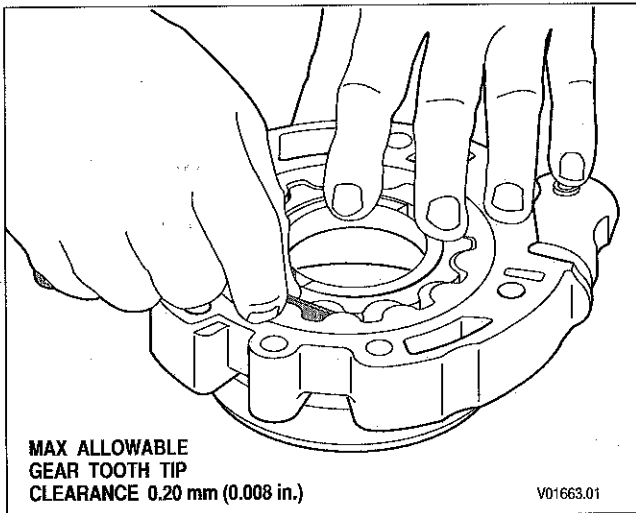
Measuring Gear Tooth Tip Clearance In The Pump Housing
